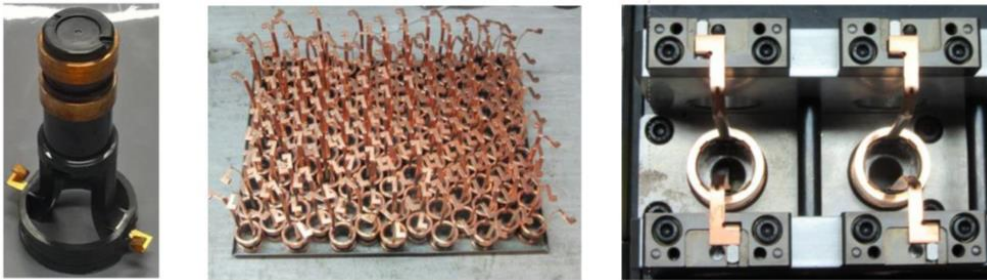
Left: Finished part after mold injection. Center: Sliding rings on a transport plate. Right: Sliding rings correctly inserted into the pallet.
